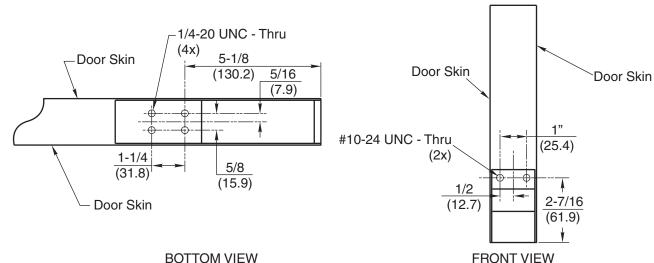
Location of drilled and tapped holes in bottom of metal door.
